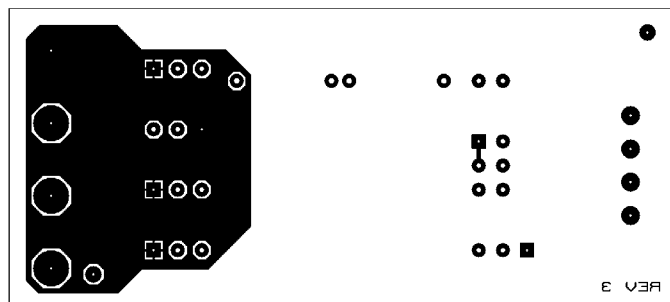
LTM2885 Demo Board Layout (DC1794A)
